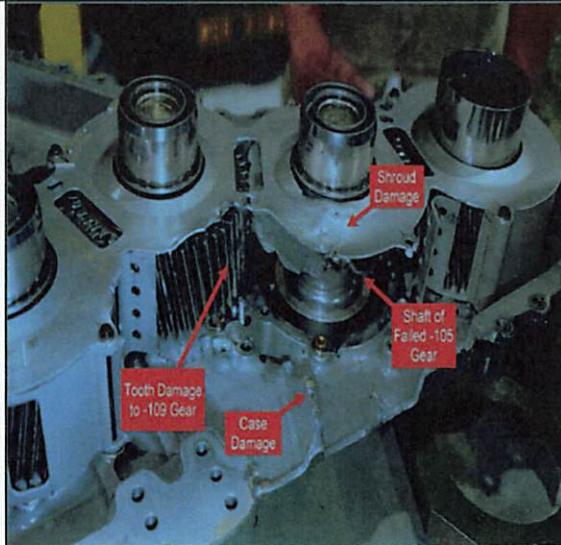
LH PRGB Outboard Case Damage with Wedged -150 Gear Segment (Tab J-39)
